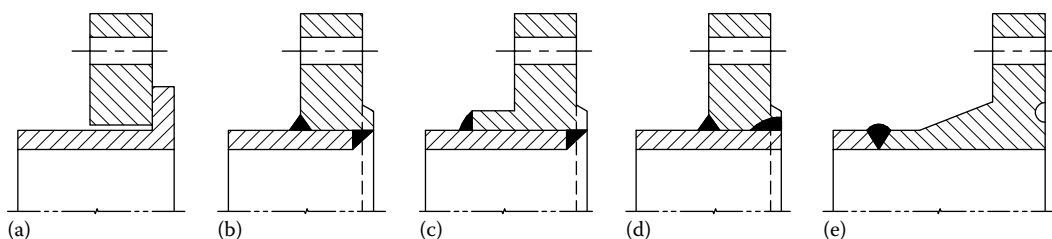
Flanged joint construction—types of bolted flanges. (a) Loose ring flange, (b) fusion lap welded ring flange, (c) fusion lap welded hubbed flange, (d) fusion through welded ring flange, and (e) fusion butt welded hubbed flange.
